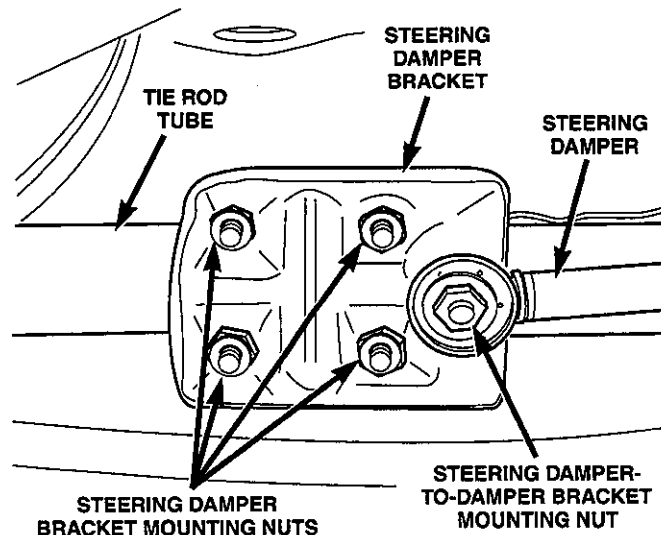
Inspect Steering Damper Bracket Mounting Nuts
